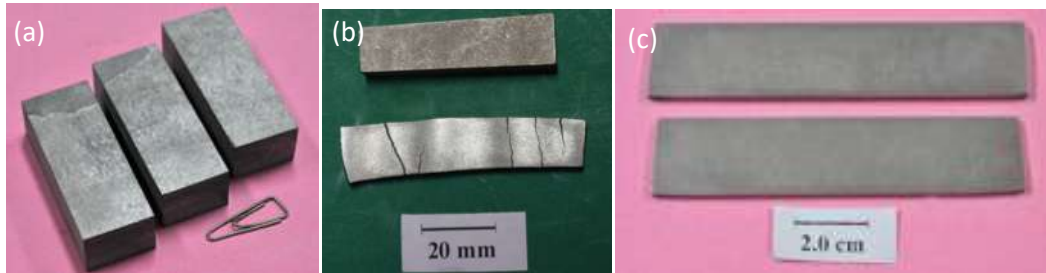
(a) Forged plates, (b) cold rolled sheets and (c) hot rolled sheets of Cb-752 alloy.
